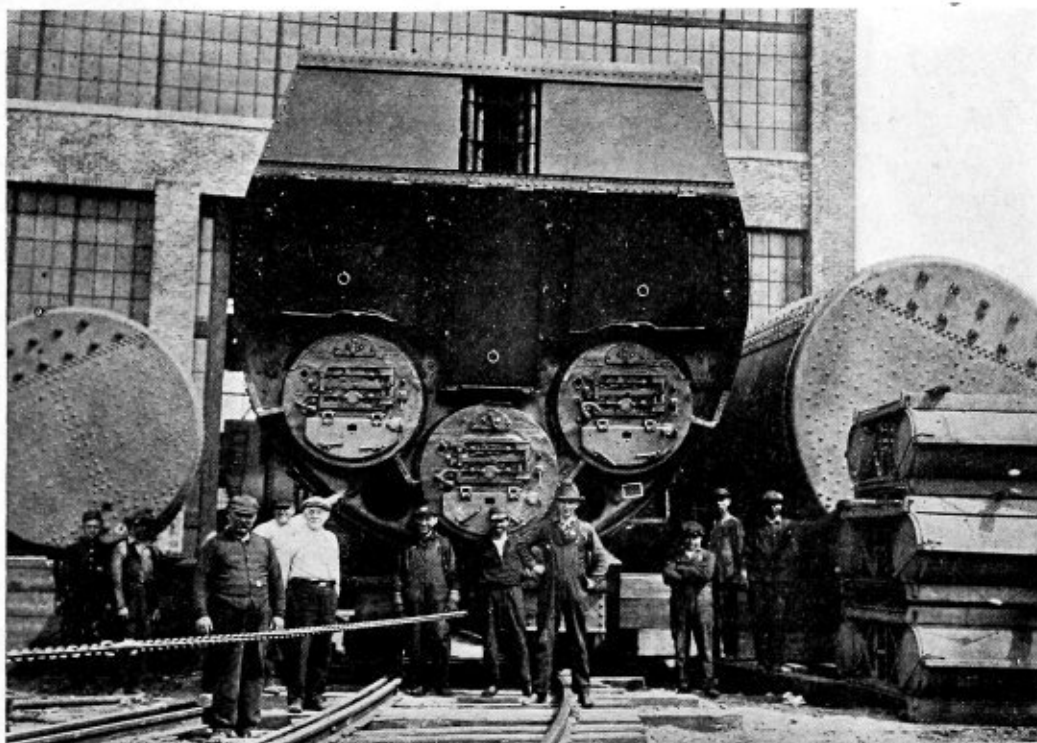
One of Three Scotch Boilers Built for the Standard Oil Company
